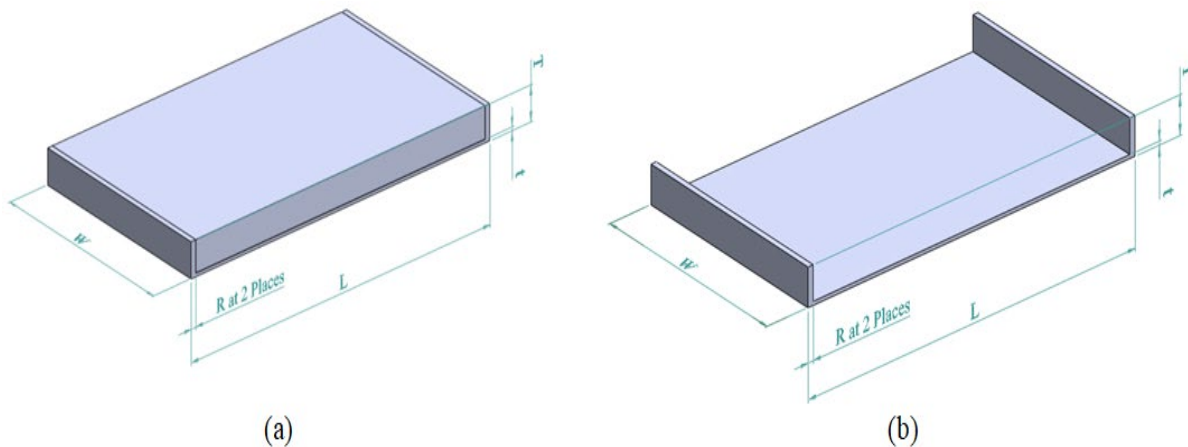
Model with dimensions: (a) Blank and (b) After material removal
